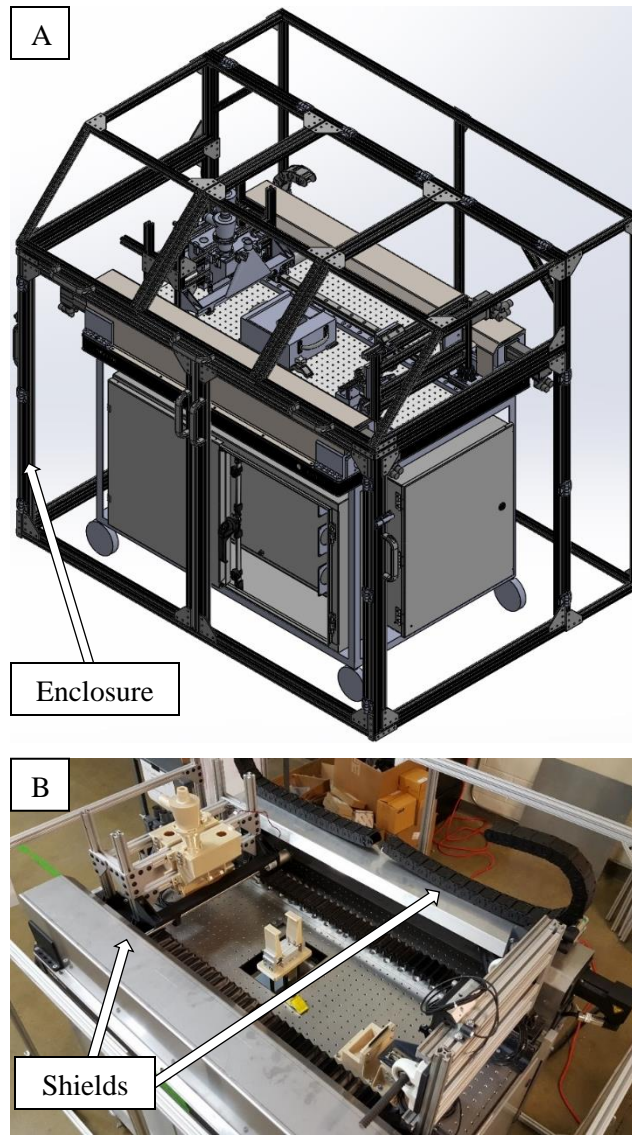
Machine enclosure (A) that would protect the surrounding environment from powder debris and shields (B) to protect the operator from axes and motors when in motion. Polycarbonate sheets would provide viewing windows and rubber seals would be in place for doors.
